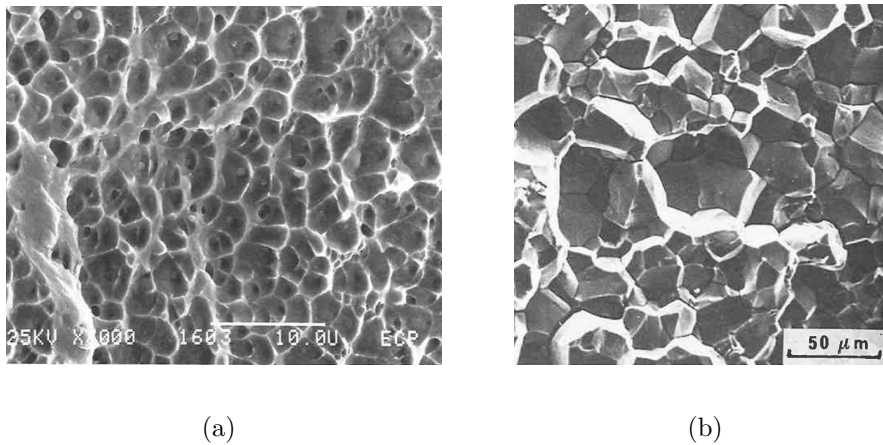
Fractographies of (a) ductile fracture of 316L steel (b) intergranular fracture at 650°C of Inconel 718 [57].
